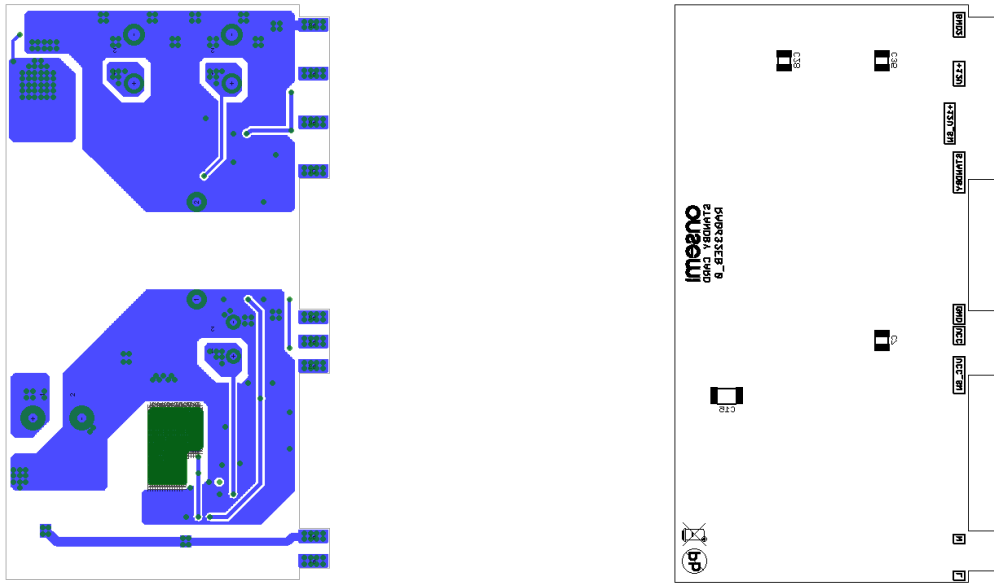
Bottom Layer PCB Layout and Assembly Plan of STANDBY CARD
